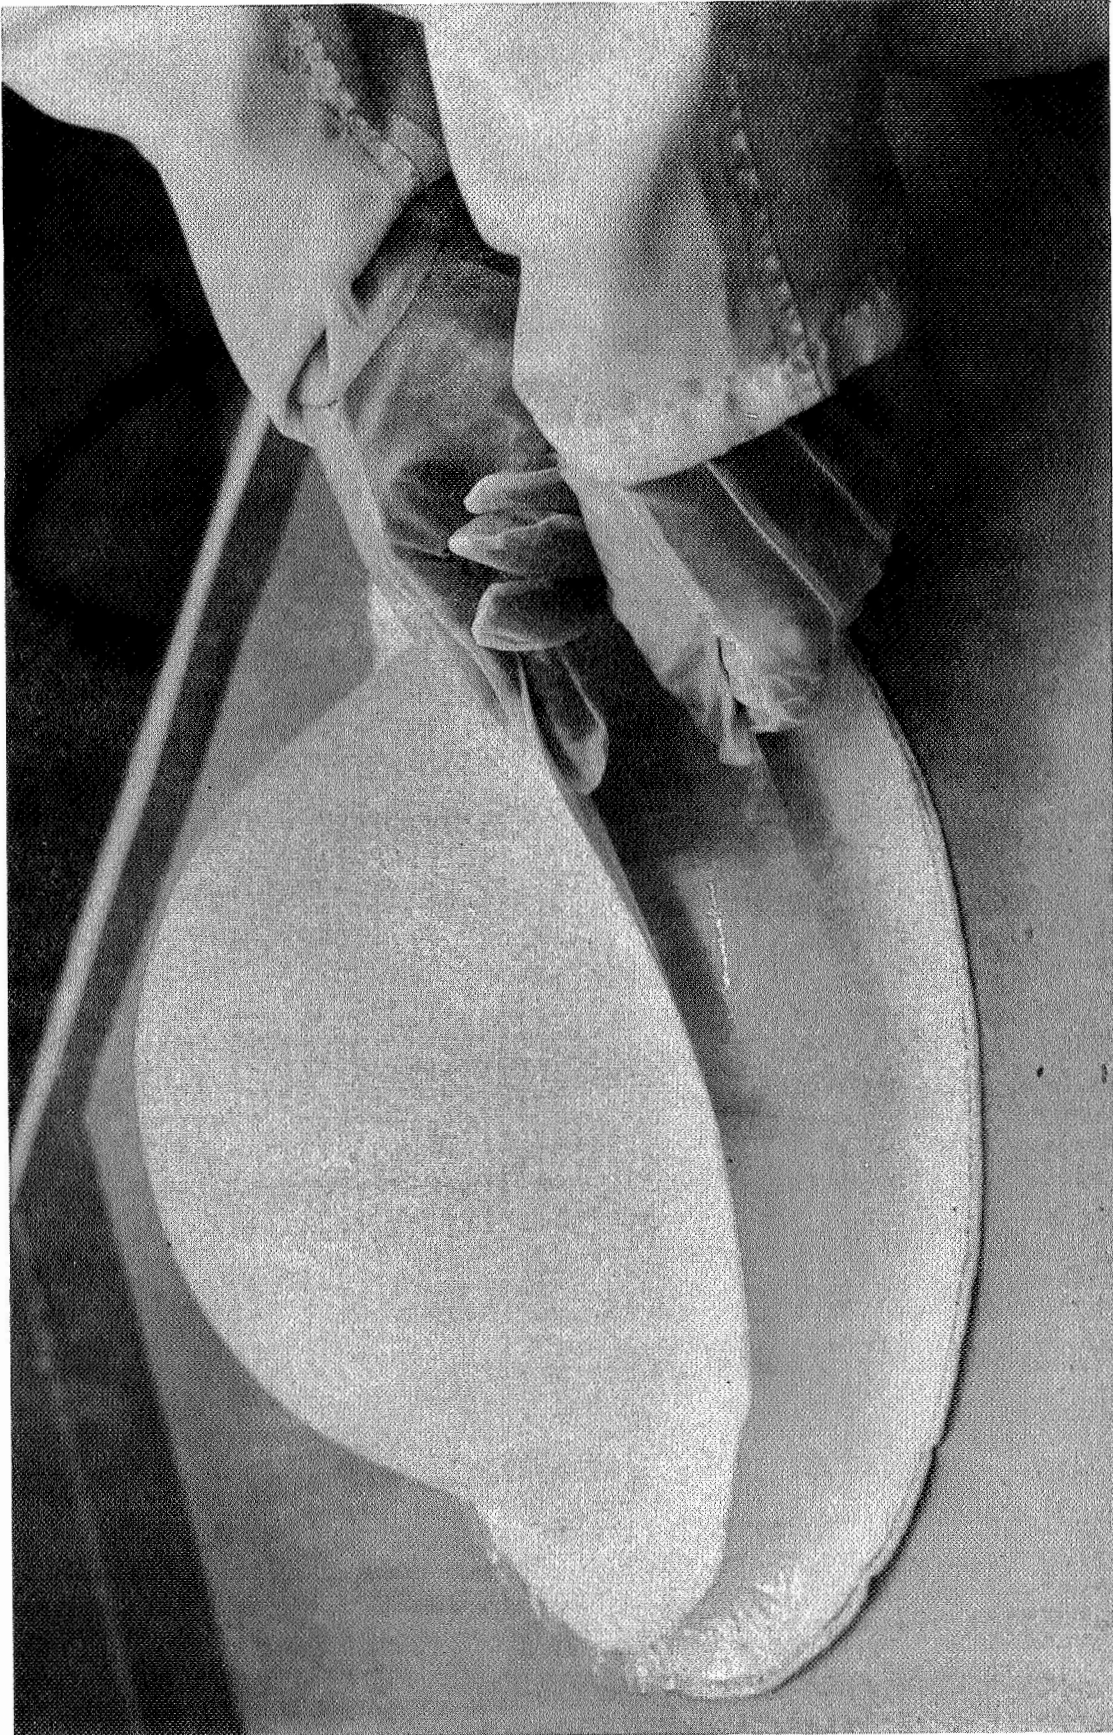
DIAPHRAGM ASSEMBLY SEQUENCE
